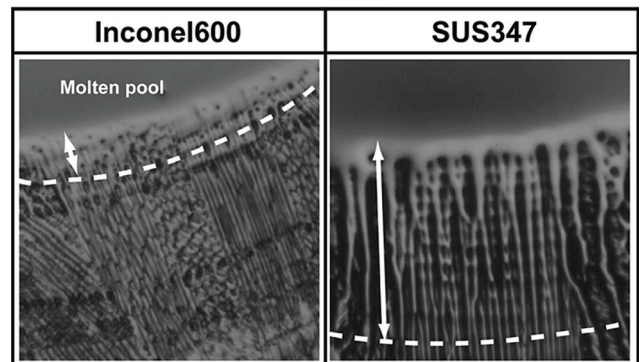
Frontlighting with a metal-halide source of weld pool solidification in Inconel 600 and AISI 347 stainless steel when welding with a 2 kW Nd:YAG fiber laser. Optics in this case used microscope lenses (Refs. 57–59).
